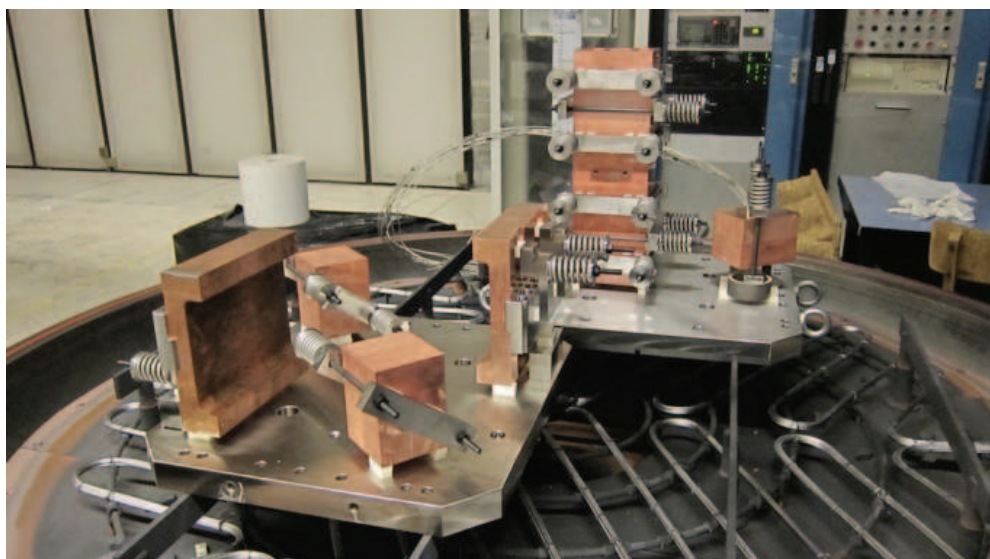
Photo of the vertical brazing test for the type C pieces with springs along with some copper blocks. The copper and stainless steel joint was tested on two additional pieces.
